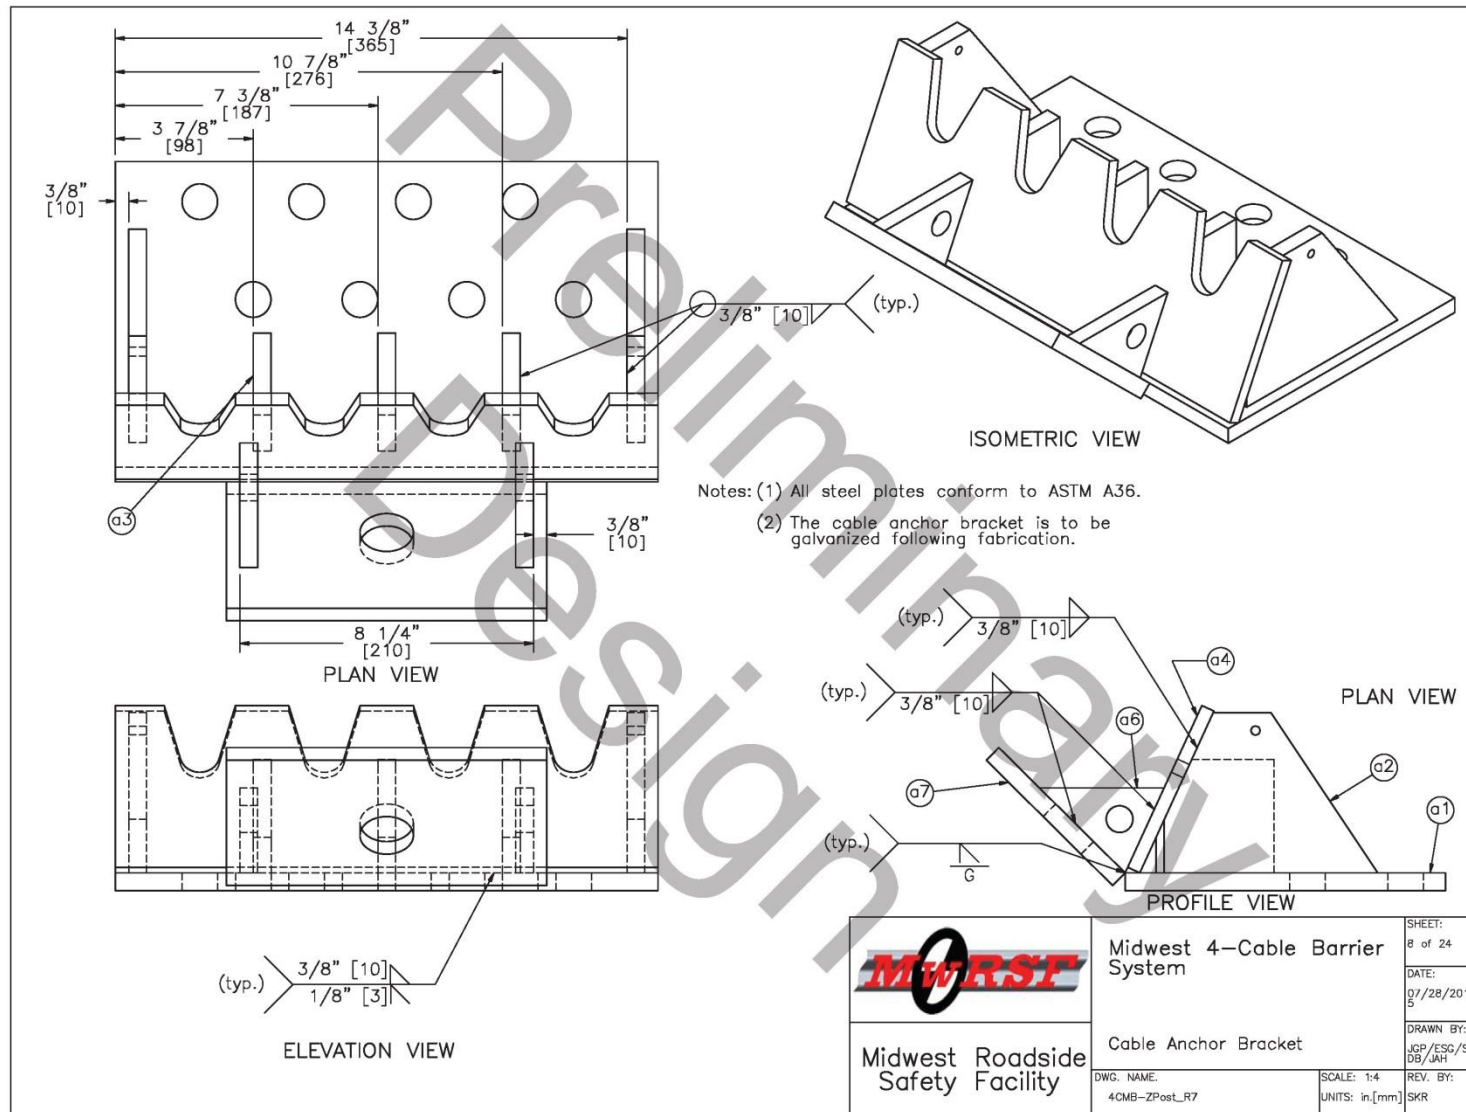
Cable Anchor Bracket, Test No. MWP-1
